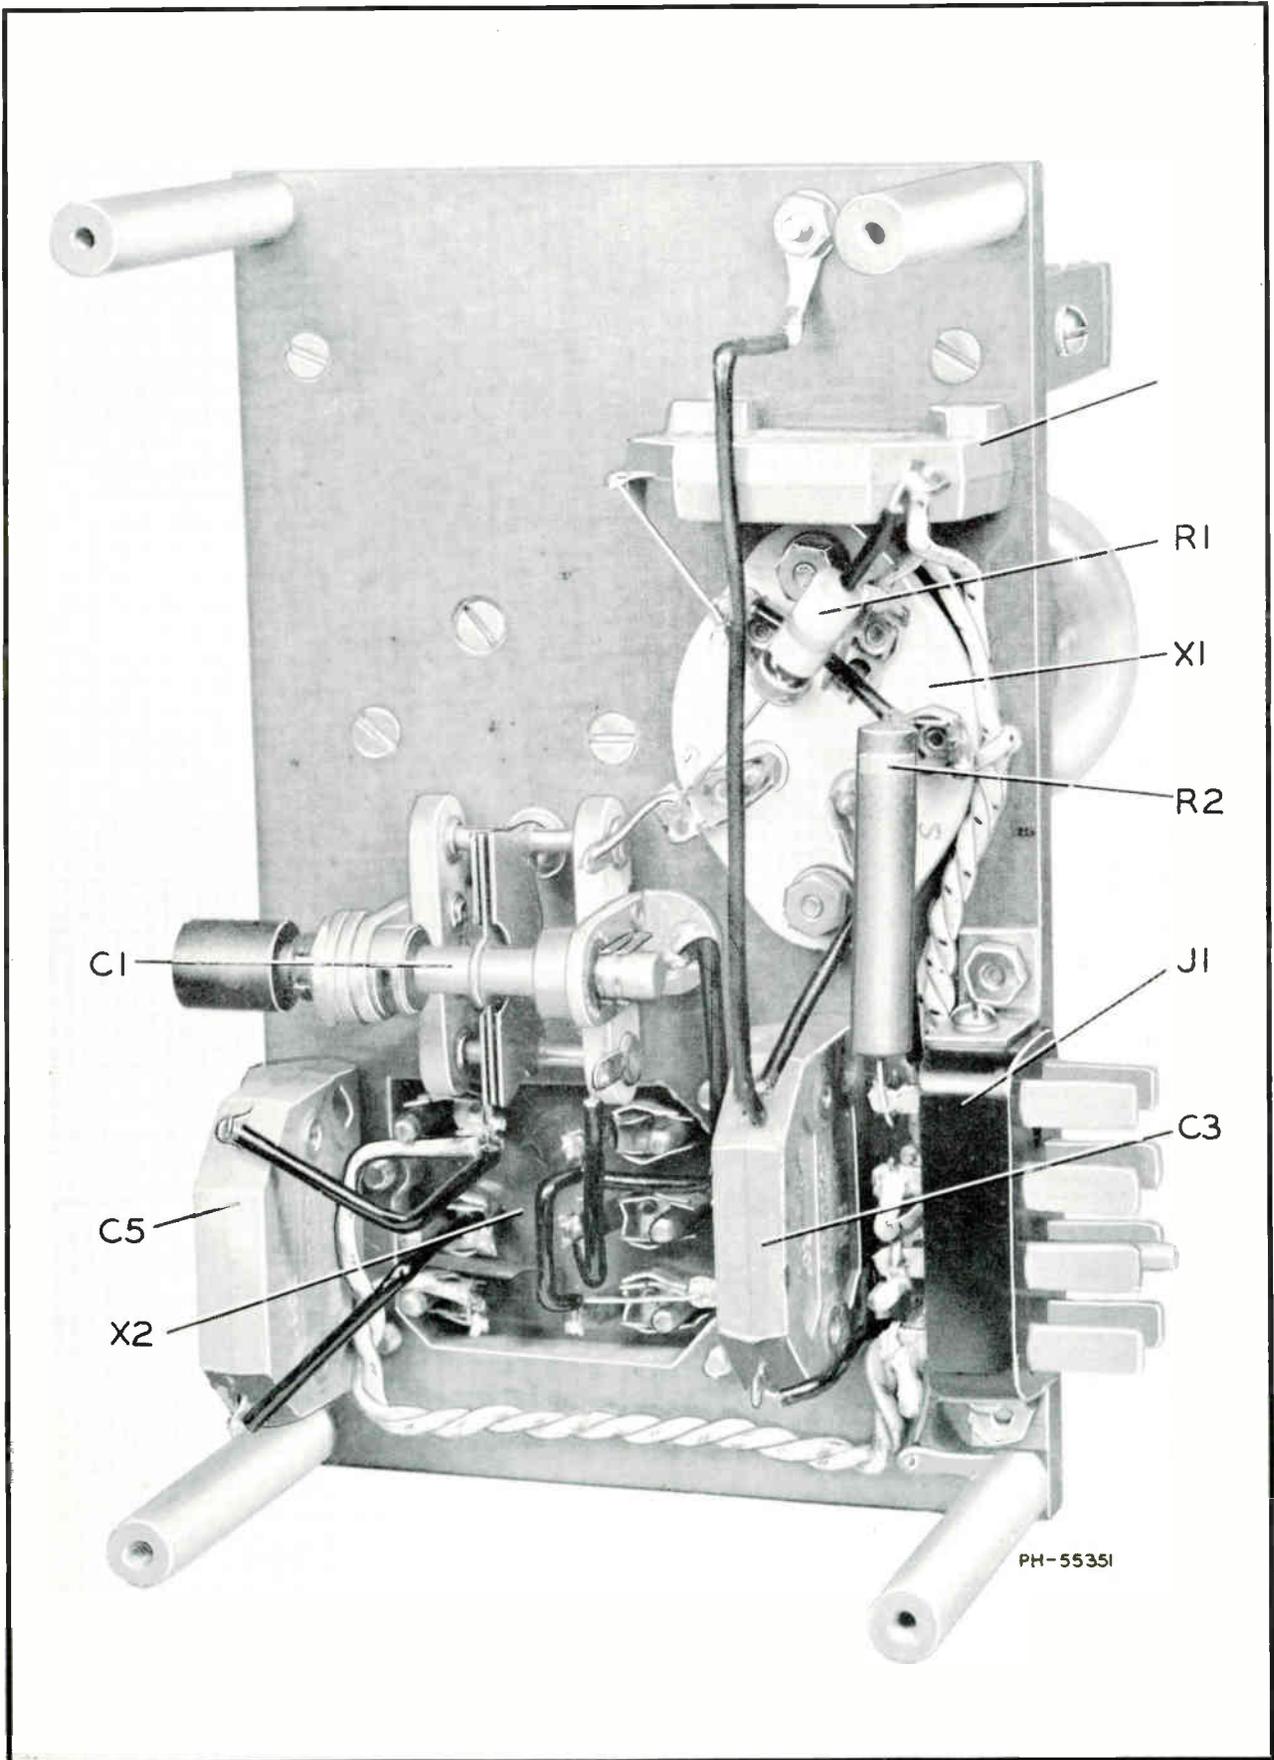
R-F Oscillator Unit (Bottom View, Covers Removed)
